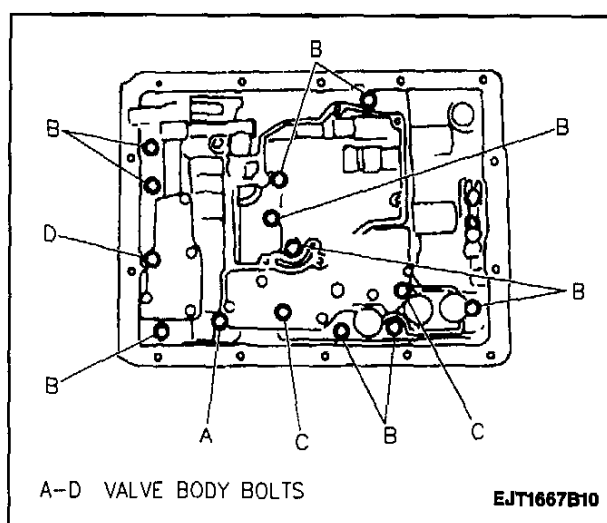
Valve Body Bolt Location (03-72LE, 4-Speed)
